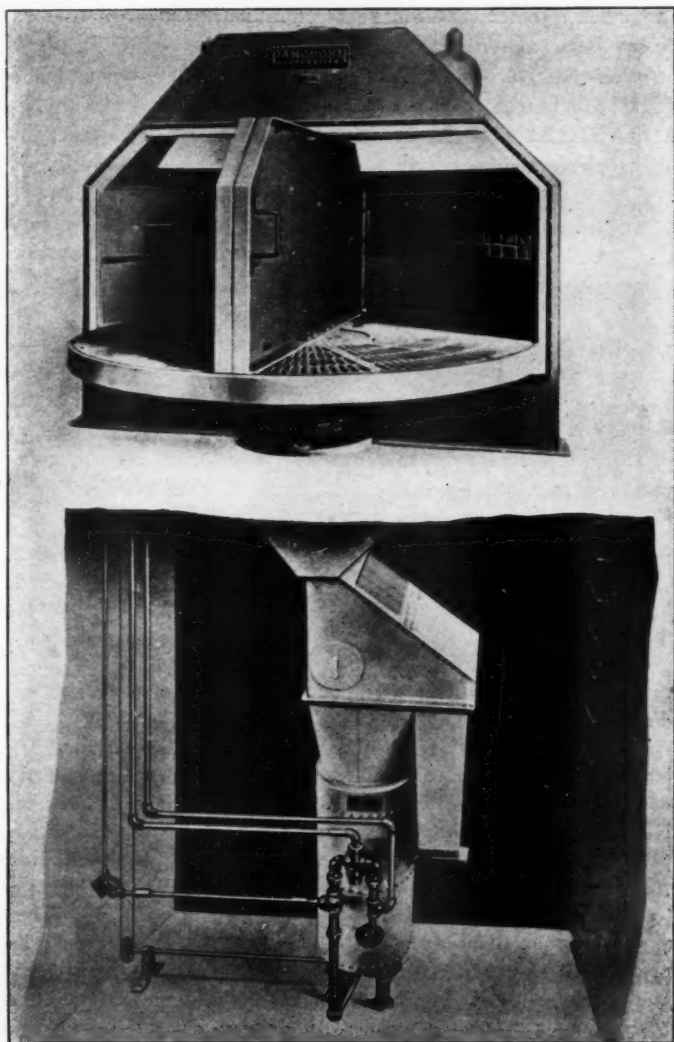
CABINET TYPE MACHINE WITH PIT FOR RETURNING ABRASIVE TO MACHINE BY GRAVITY
